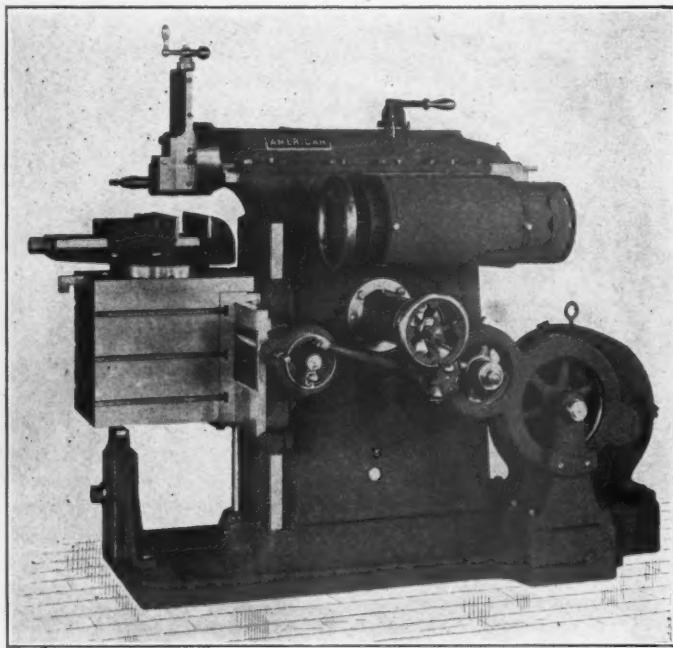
THE NEW "AMERICAN" SHAPER, SHOWING AN EXCELLENT APPLICATION OF MOTOR DRIVING.
